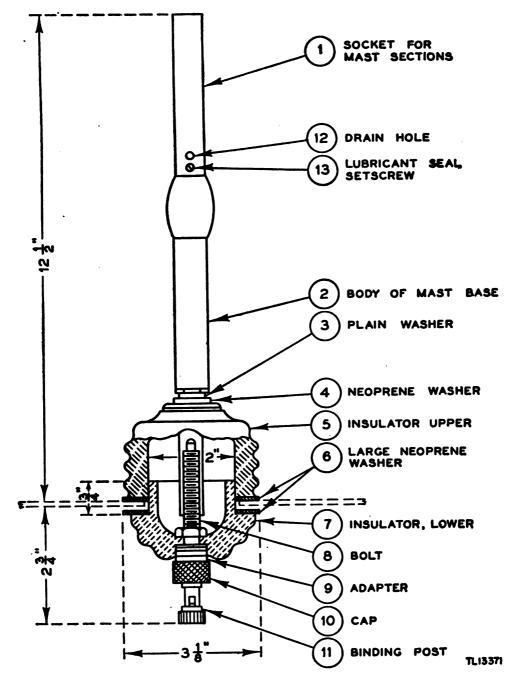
Assembly of Mast Base AB-15/GR, using Wire W-128 lead-in.
